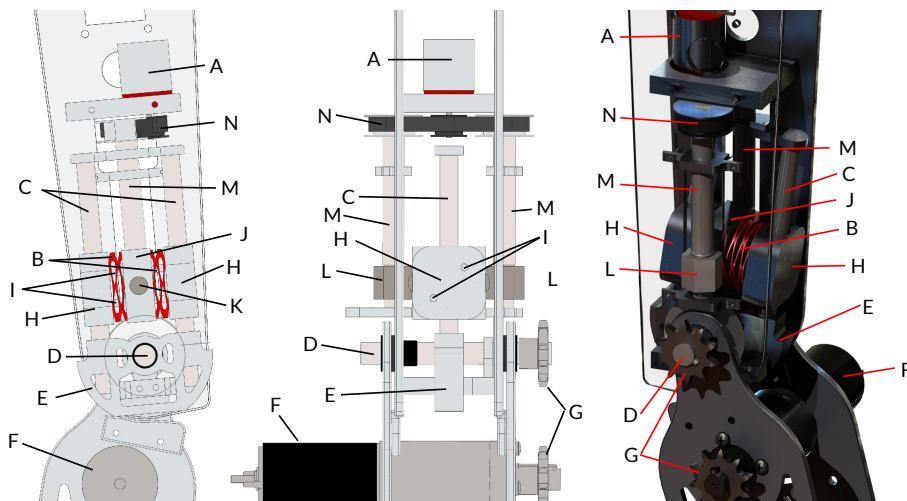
Example Implementation of MAwAS mechanism. The components are: A) Stiffness adjustment motor B) Wave springs C) Intermediate arm bars D) Joint shaft E) Intermediate arm base F) Drive motor G) Chain transmission H) Spring mounts I) Spring mount guide links J) Pivoting spring mount K) Pivoting spring mount shaft L) Hex nuts M) Leadscrews N) Timing belt transmission
